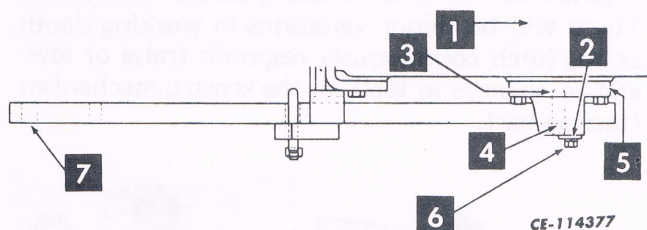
Swinging Drawbar on Machines with Three-Point Hitch
